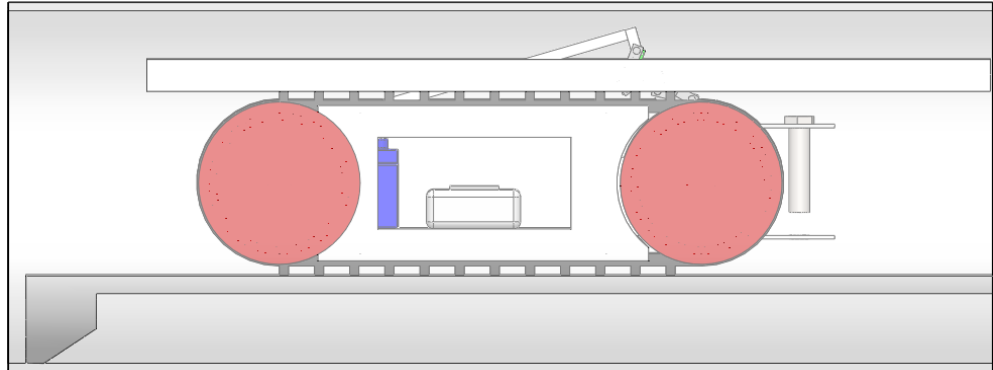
Side View of Rover Resting Between Platform and Upper Braces
